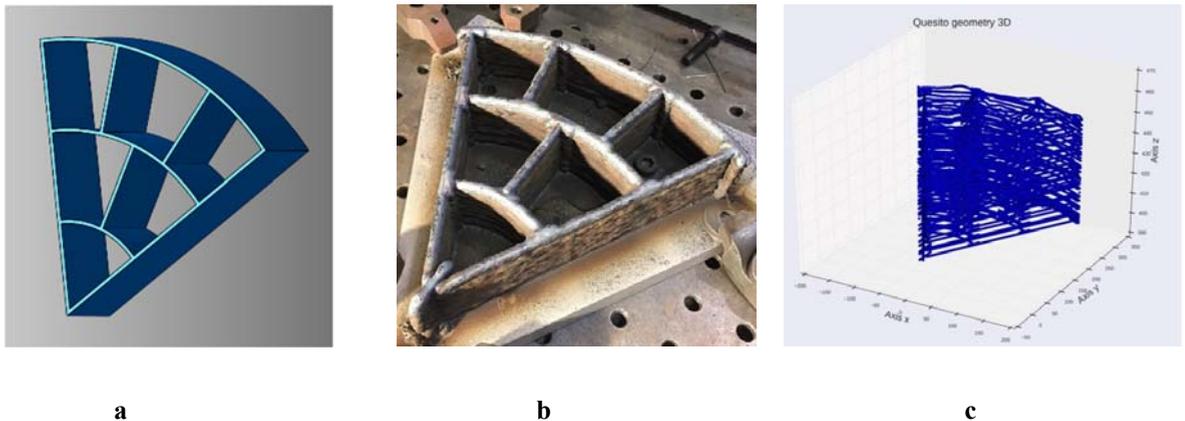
(a) Part design using CAD software; (b) Final manufactured piece; (c) Manufactured 3-dimensional geometry, where the machine corrections in axis Z are visible.
